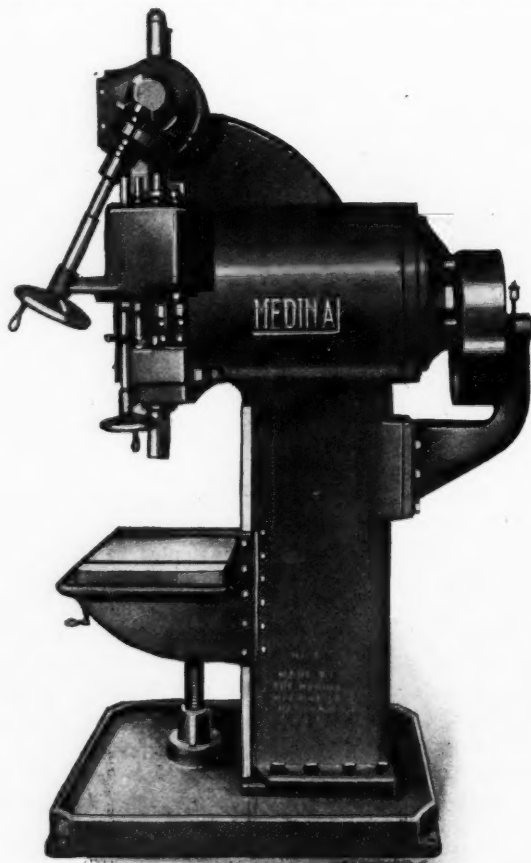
Medina Heavy-duty Drilling and Boring Machine
